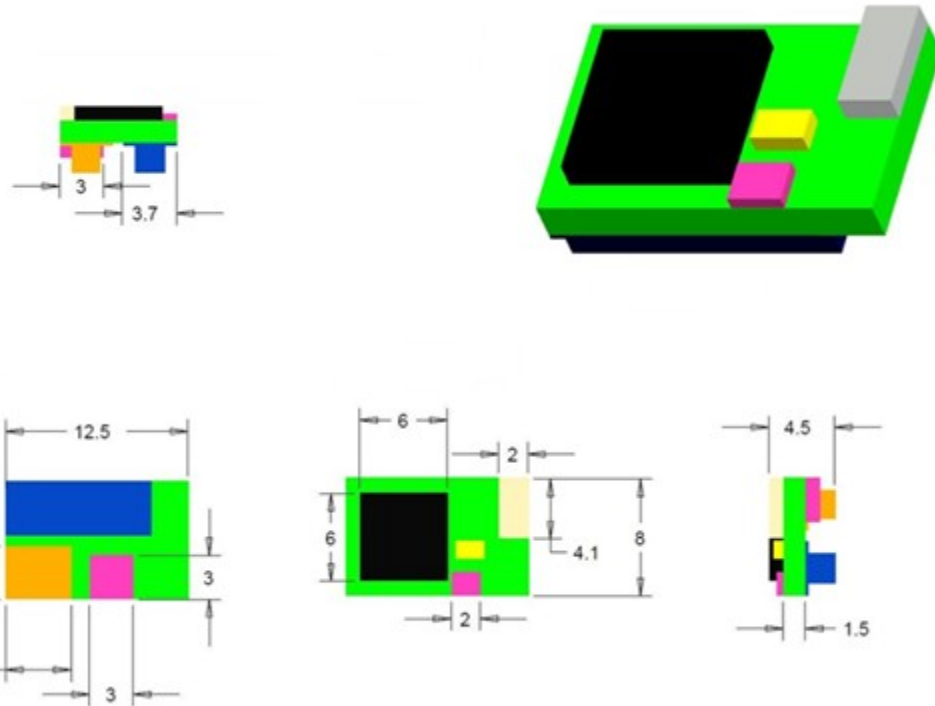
CAD drawing of base module. (Dimensions in mm)
